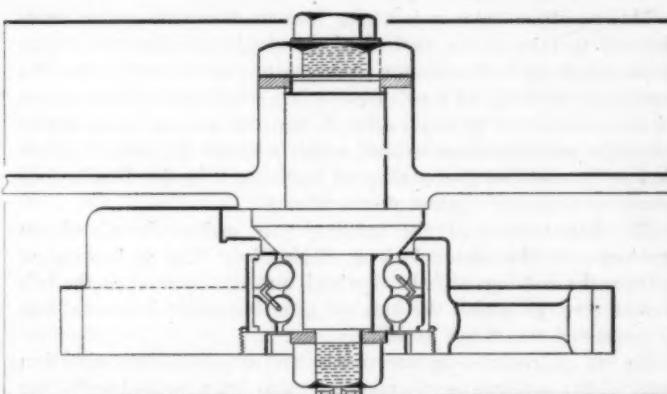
Auxiliary balance gear showing New Departure ball bearing and eccentric spindle with adjusting nut outside
